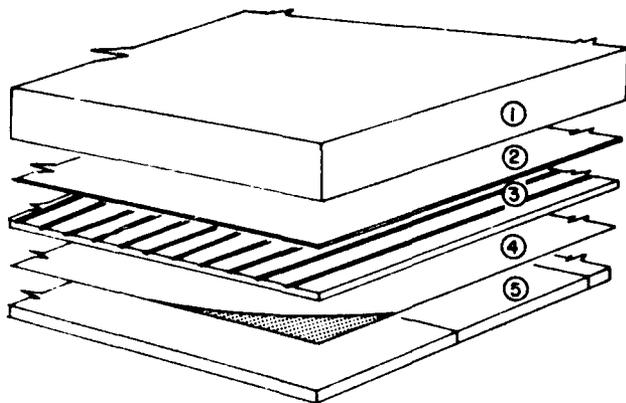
Caul designs for drying presses. Components are ① steam- or oil-heated platen, ② aluminum sheet metal in. ert., ③ aluminum vented caul with 1/8-inch holes on 1-inch centers and a back channel (1/8 x 1/8-in.) vent, and ④ 60-mesh fourdrinier bronze wire screen. Specimen is ⑤. (ML 84 5658)
